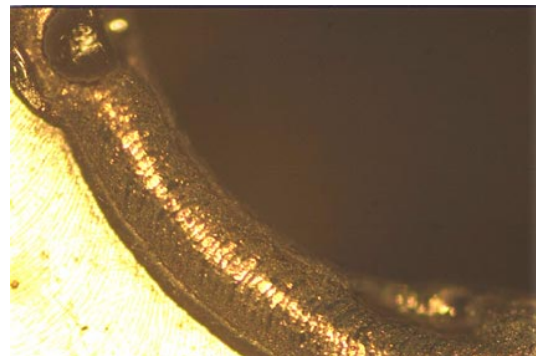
Bad welding seam with a hole and a gap.
